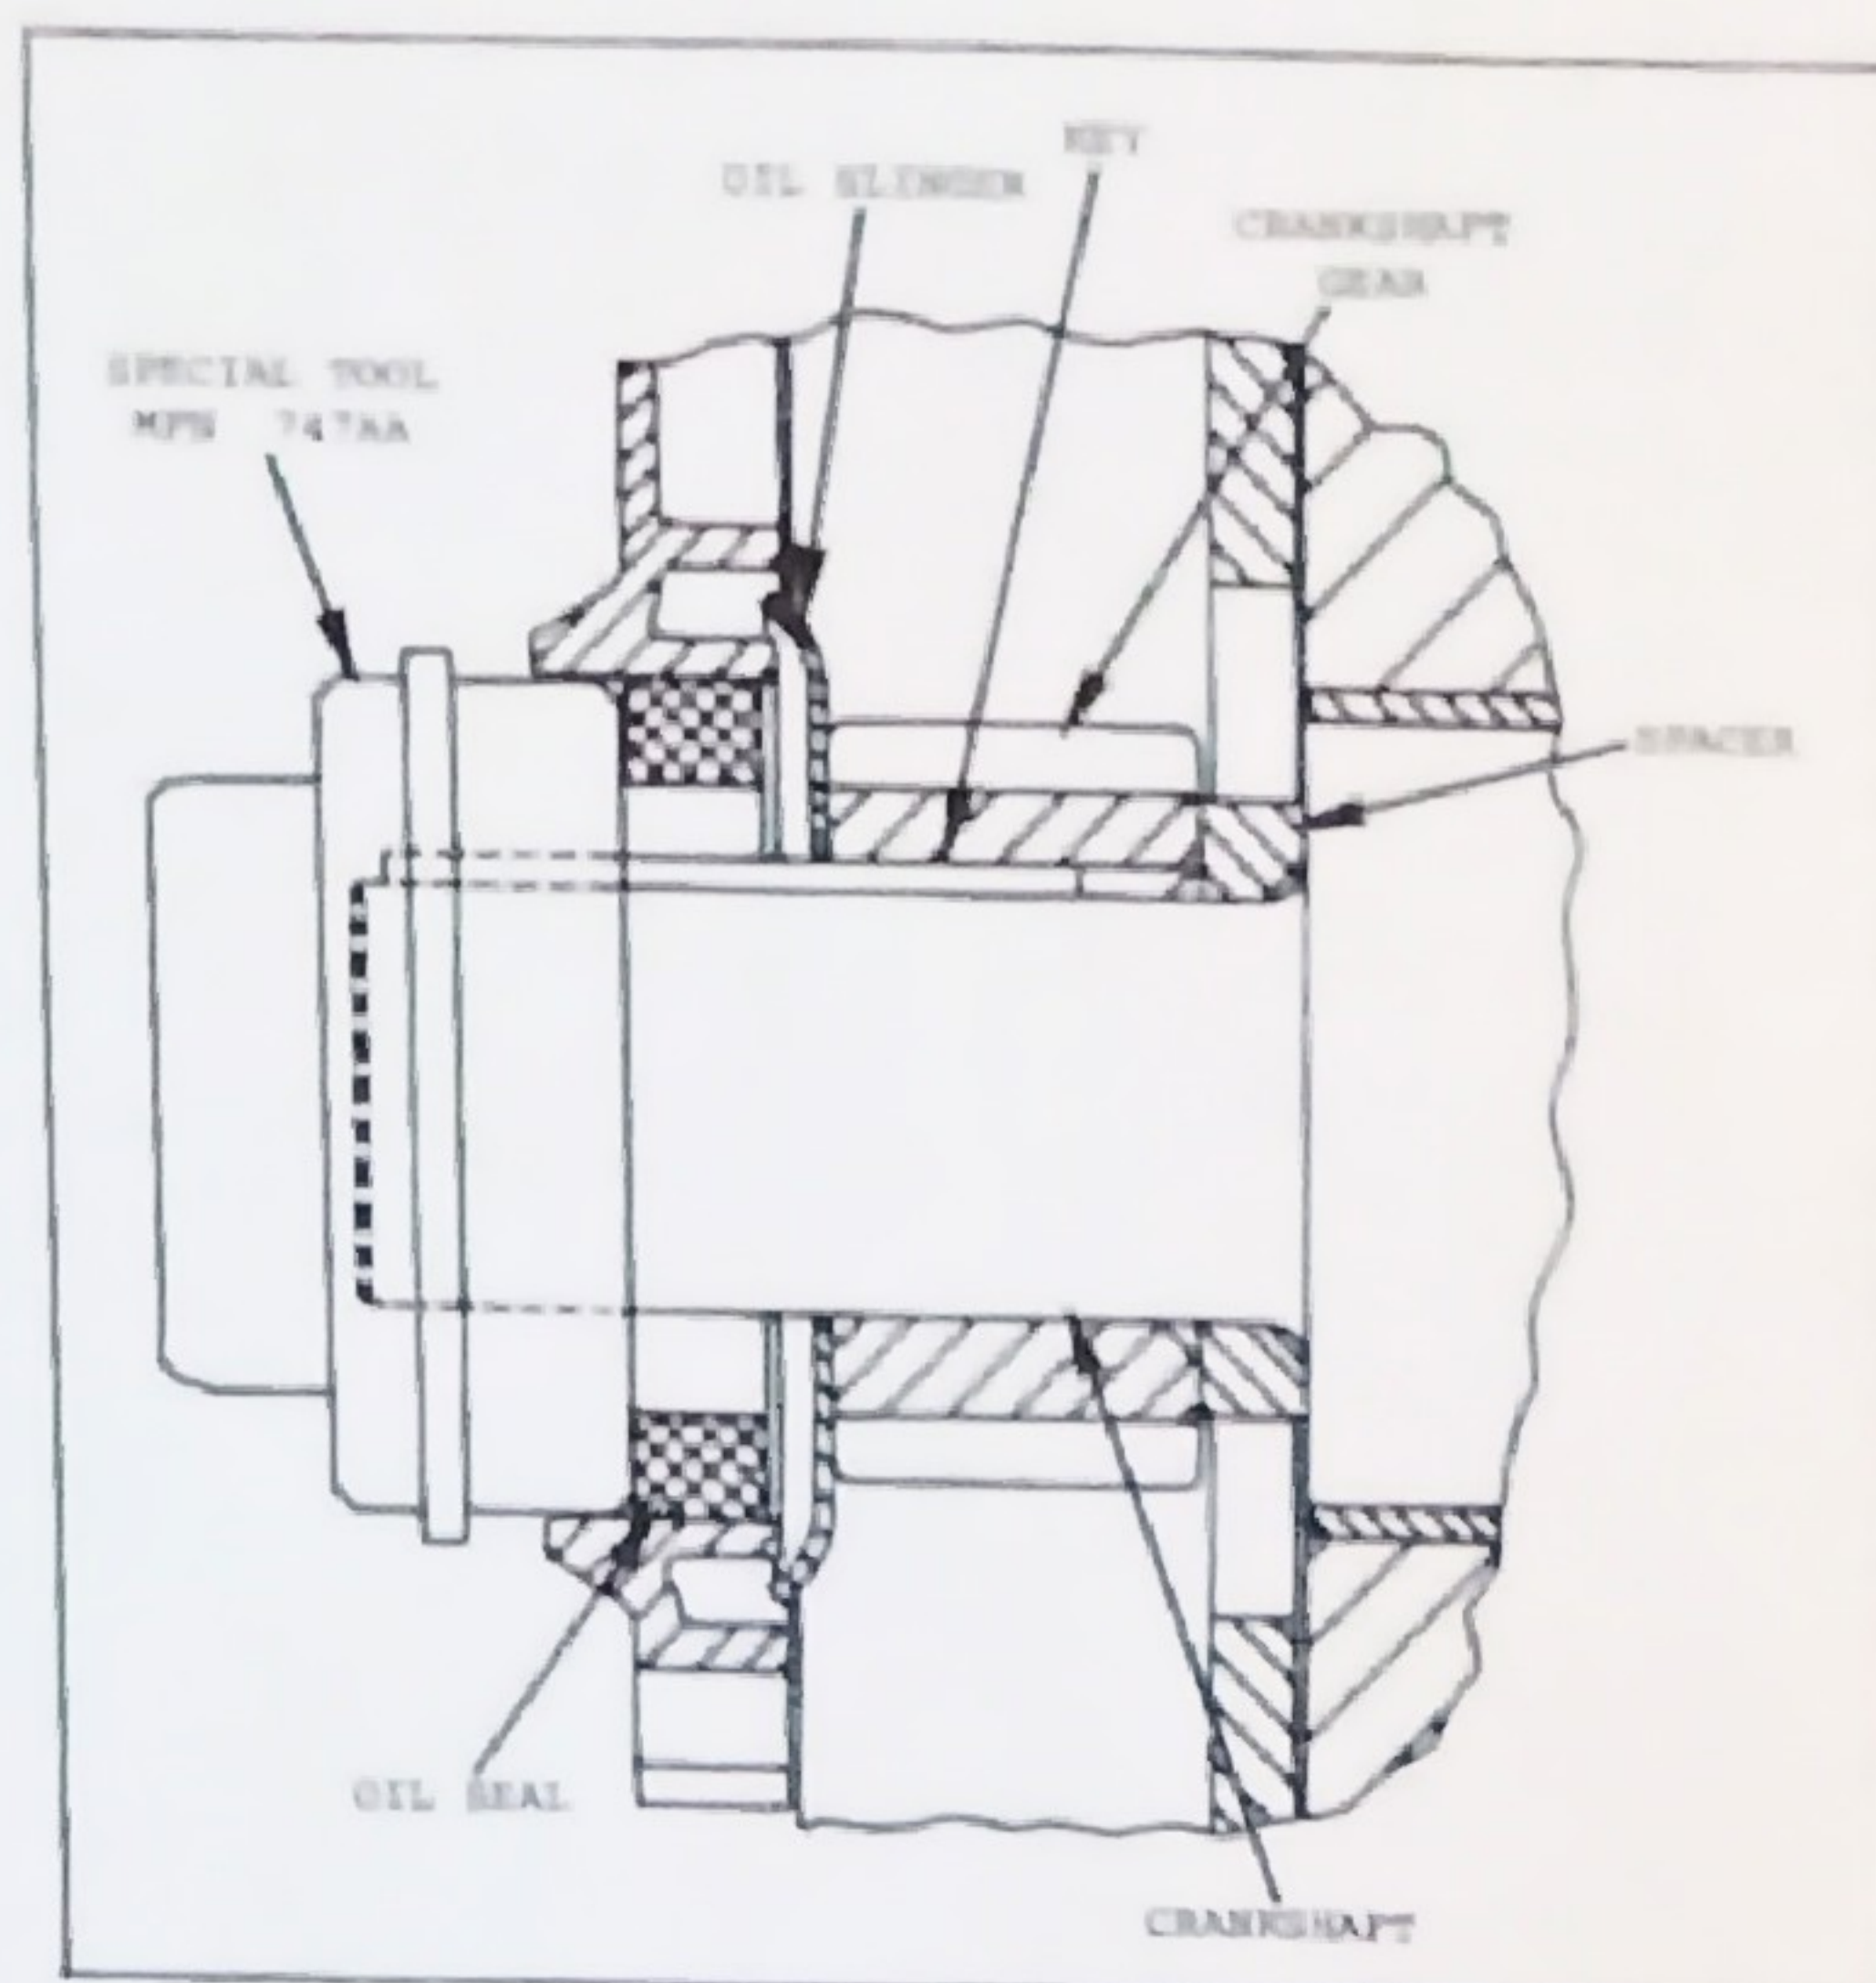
Sectional View Showing Timing Gear Cover Locating Side of Special Tool MFN 747 AA - Shown being Used with Oil Seal in Place
